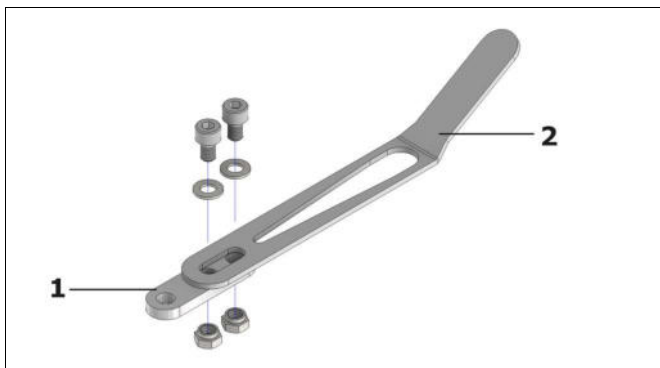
Mount the extension of the folding lock plate (only Gekko fx 26)
